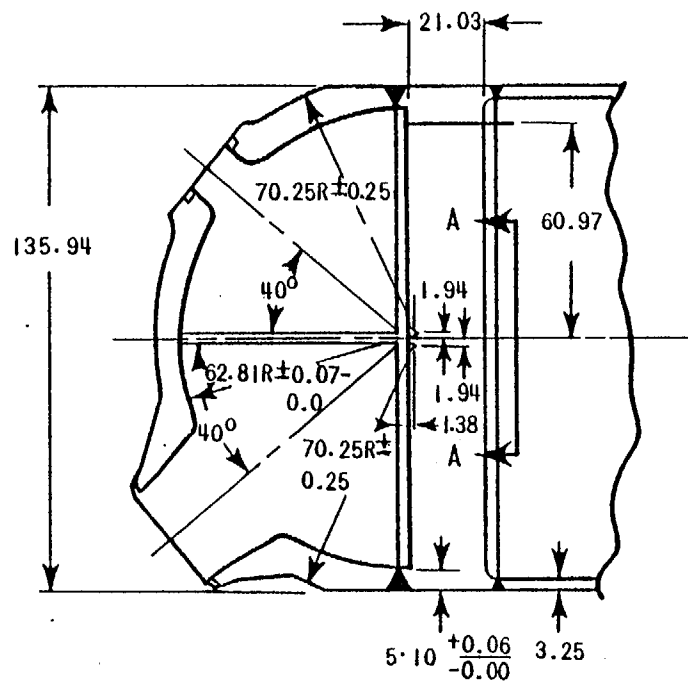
Tube Sheet-Channel Head-Stub Barrel Assembly Dimensions
